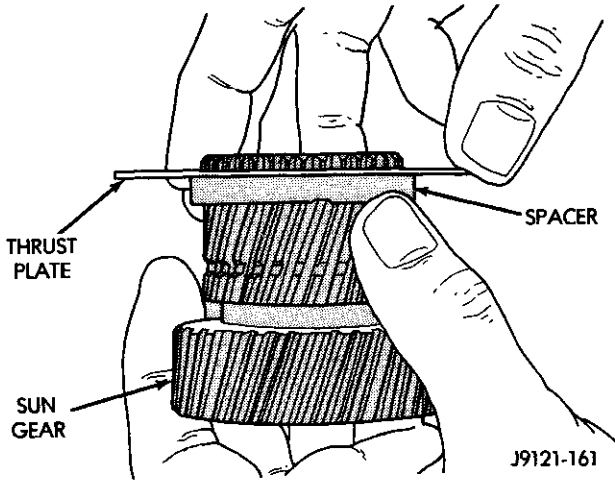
Installing Driving Shell Front Thrust Plate On Sun Gear
